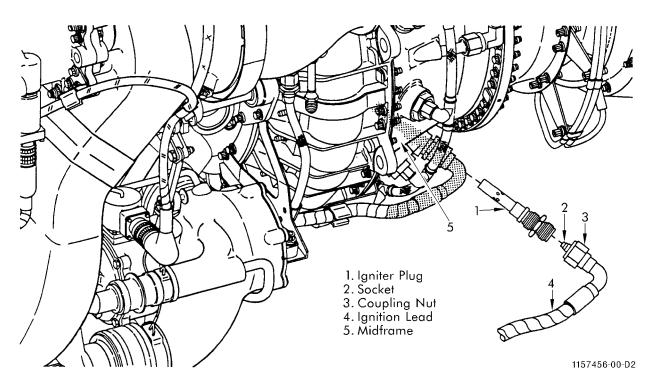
(T701, T701C, T701D) Igniter Plugs; Removal and Installation
